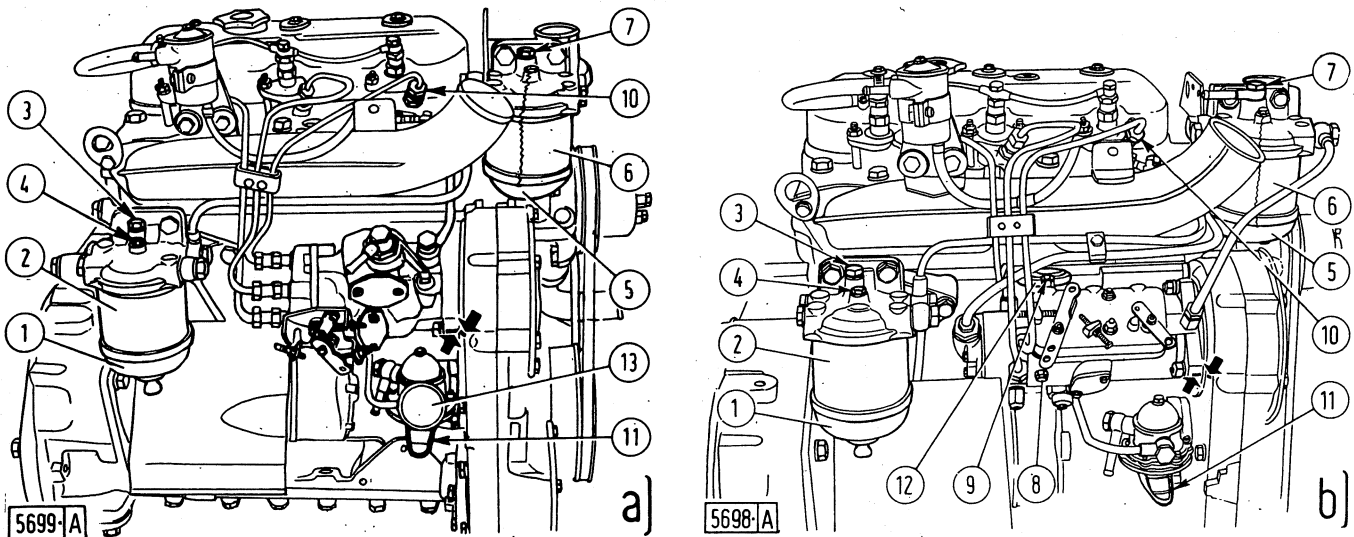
Bleeding the fuel system of engines fitted with Bosch (a) and CAV (b) injection pumps.
